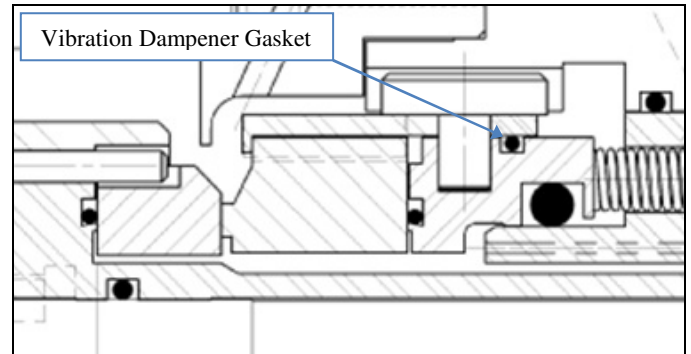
Seal Assembly Showing Vibration Dampener Gasket
